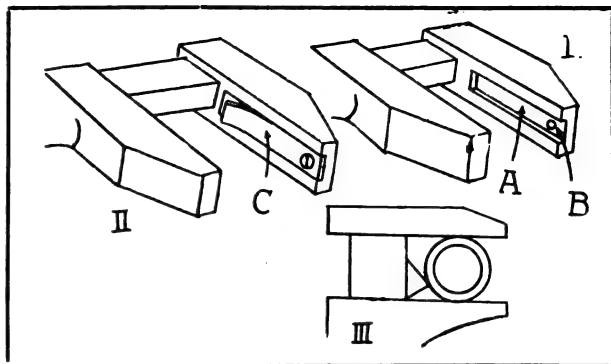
I, Jaw Slotted for Spring; II, Spring Attached Prevents Nuts from Dropping; III, Broken Three-Cornered File Used in Conjunction with Monkey Wrench for Turning Smooth Surfaces.
